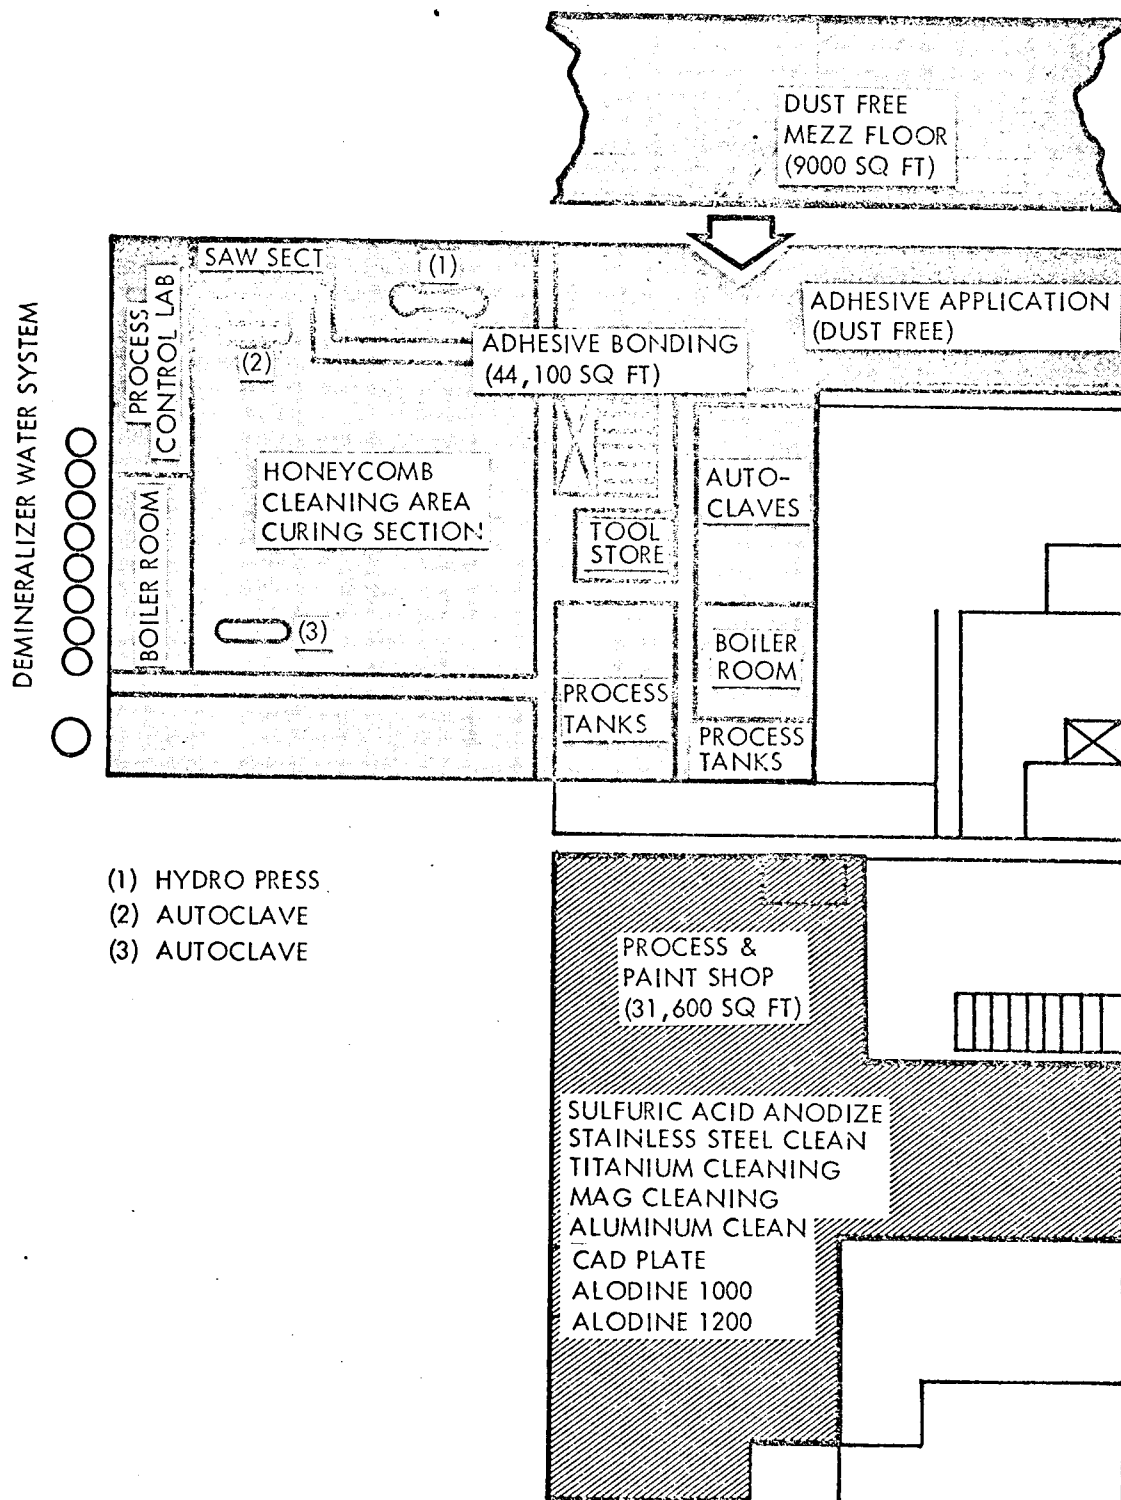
ADHESIVE BOND SHOP FACILITY
